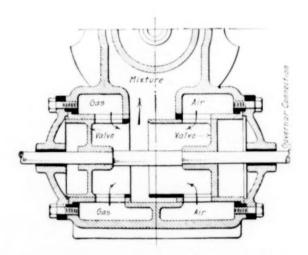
Section Through Throttle Valve of a Horizontal Double-Acting Gas Engine
